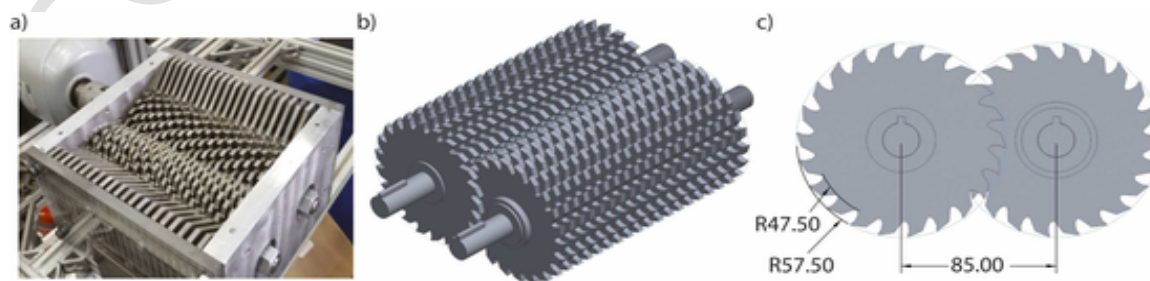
A custom-built bench-scale shredder. (a) Photograph of the laboratory-scale shredder, (b) 3D computer aided assembly (CAD) of the cutter and clearing plates, and (c) layout of the adjacent cutters (all dimensions are in mm).
